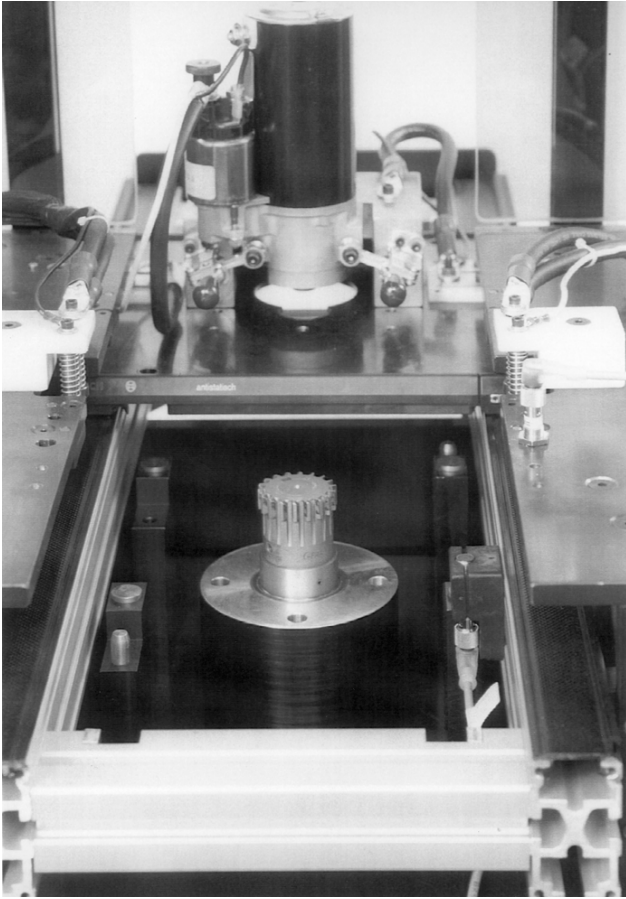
Coupling to a DC starter motor from below via a gear that mates with that of the starter motor's drive.
